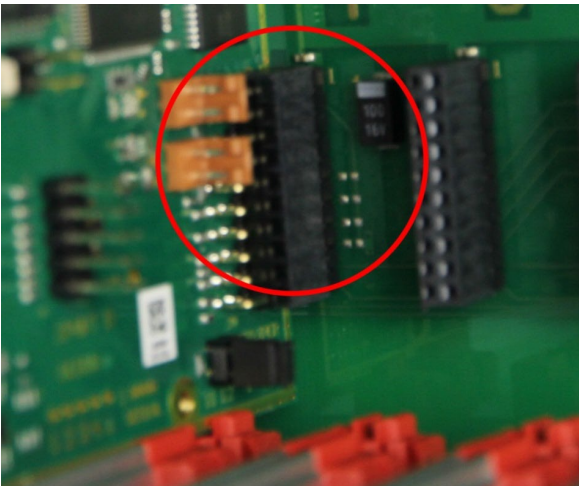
USB 2.0 stand-alone module mounted in a 21-Slot slide-in chassis
